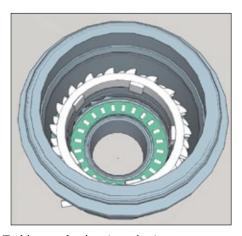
Turbine mechanism (top view) Rysunek 4. Mechanizm turbiny (widok z góry)
